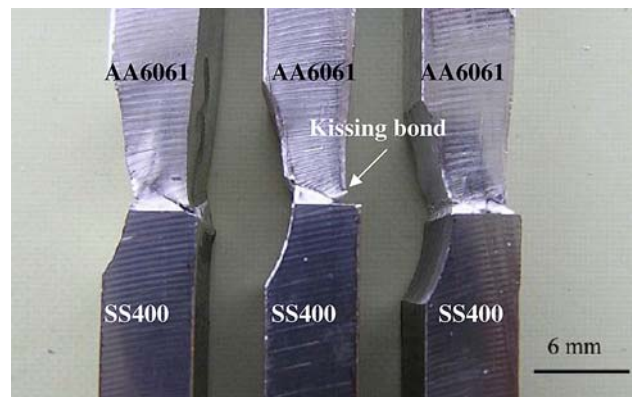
Specimens after tensile tests, broken from the nearby adjoining plane of the aluminum alloy and the low-carbon steel
